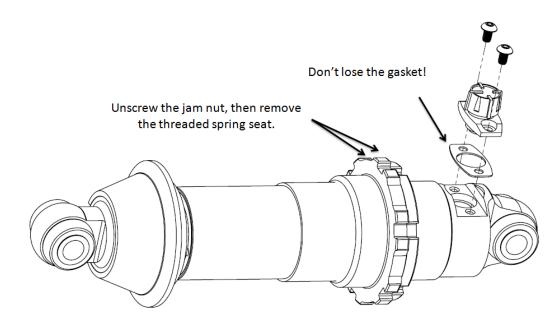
The shock adjustment knob must be removed for installation of the spring.
